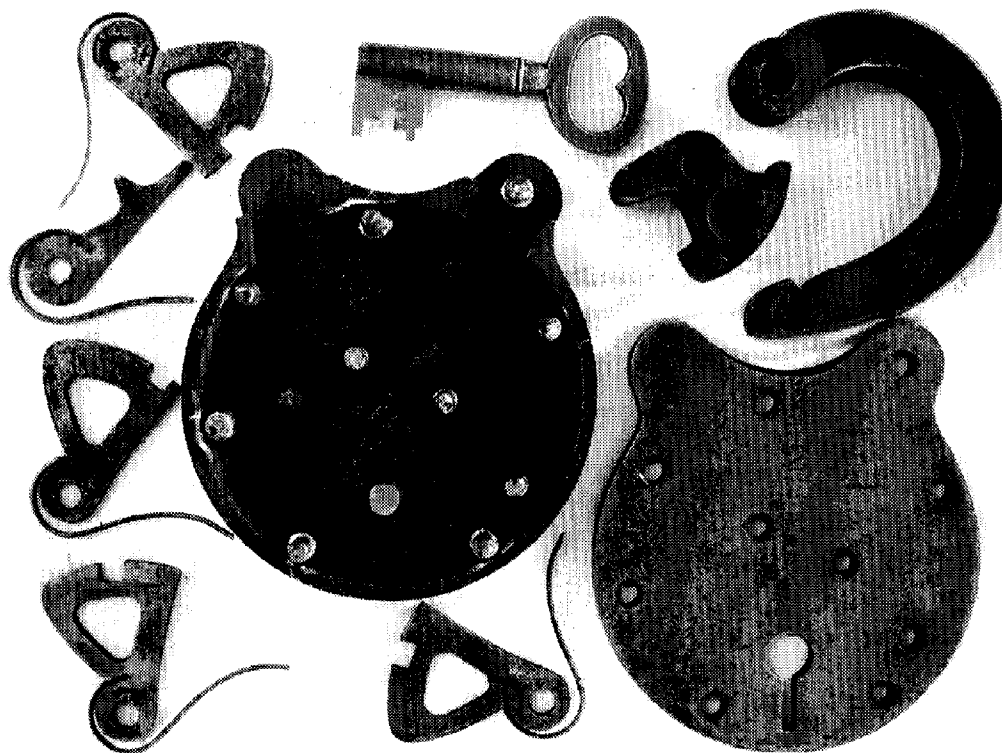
Completely disassembled lock. The parts have been marked to insure that they are reassembled in the original order.
